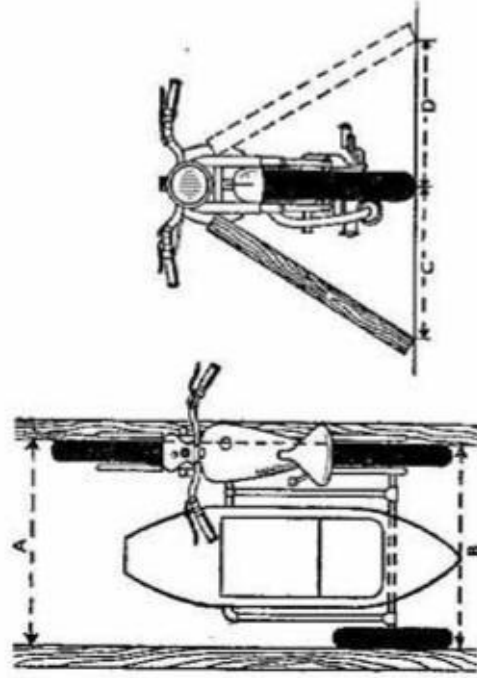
CHECKING WHEEL ALINEMENT ON A SIDECAR OUTFIT
